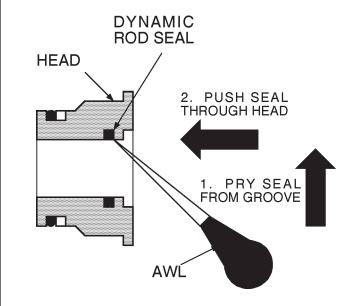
DYNAMIC ROD SEAL REMOVAL
